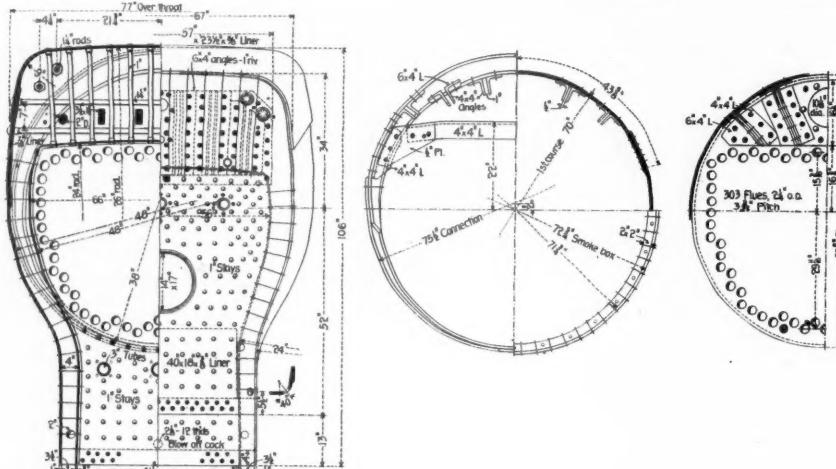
A.—Boiler Details, Ten-Wheel Passenger Locomotive, Great Northern Railway
